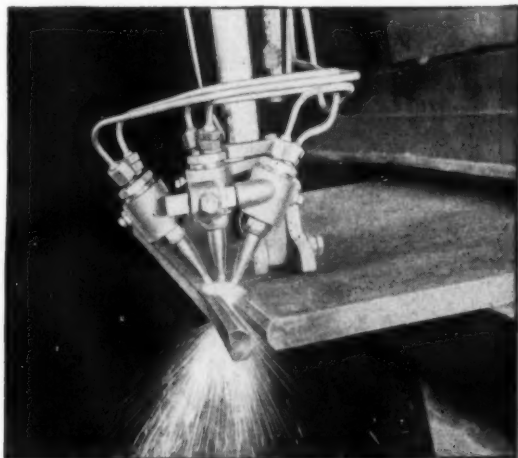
A cutting machine of this type permits side stepping heavy equipment yet provides for accurate cutting.
